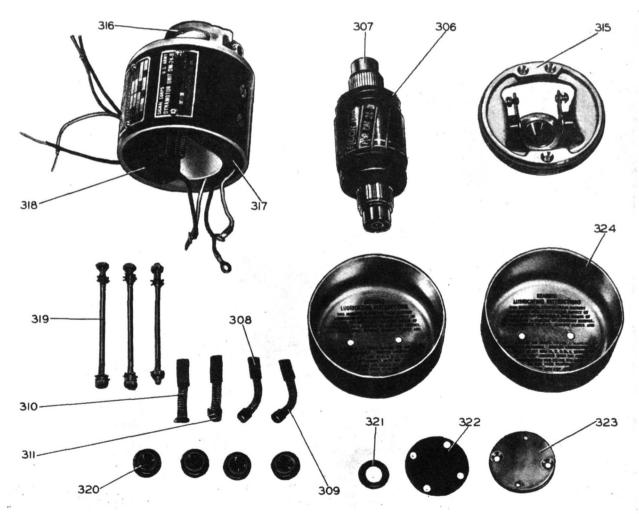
DYNAMOTOR DM-24-B, DISASSEMBLED
